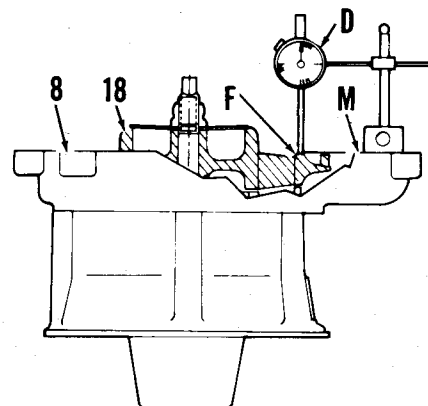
View showing dial gage placement to determine fan wheel shim size as outlined in text.
